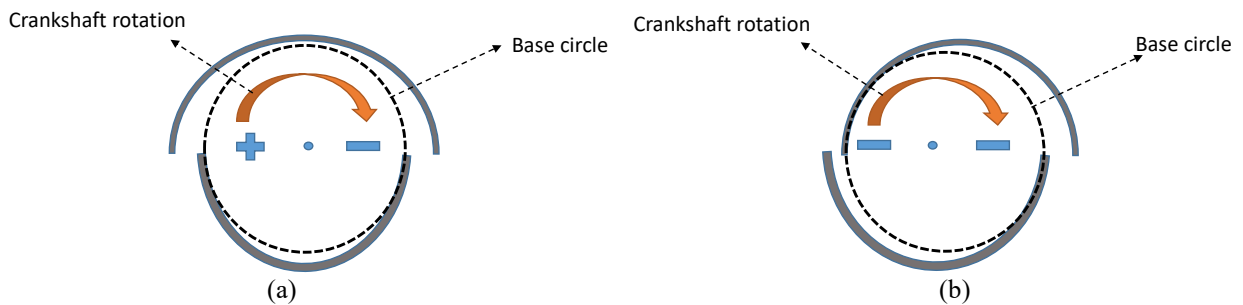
Schematic shape of (a) main bearings with an exception of bearing No. 4, and (b) main bearing No. 4.
